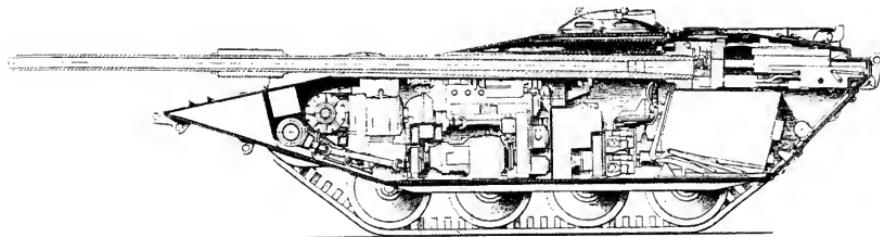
Cross section of the turretless Swedish S-tank with a fixed gun mounting. (Bofors)
